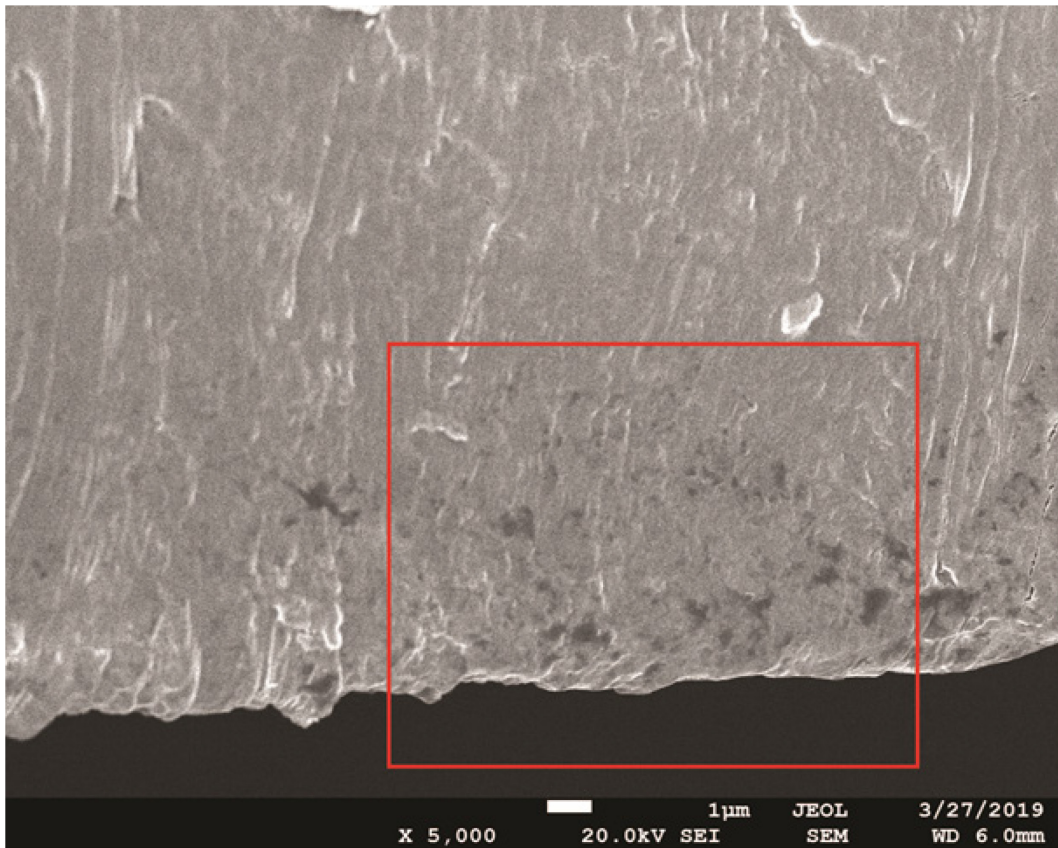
Edge of fracture surface (magnified 5000x).
